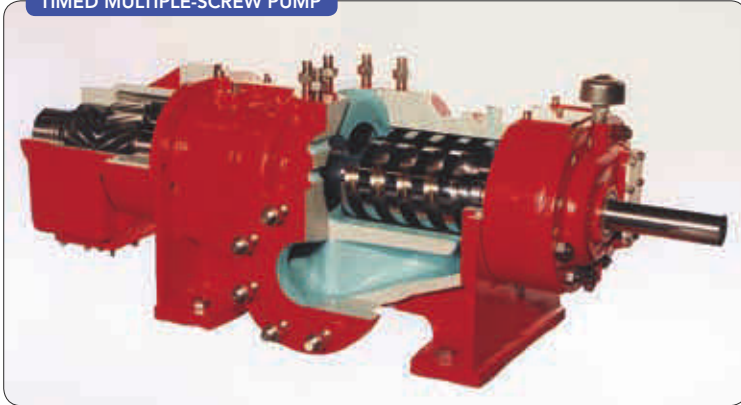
No metal-to-metal contact occurs between the rotors or rotors and casing.
